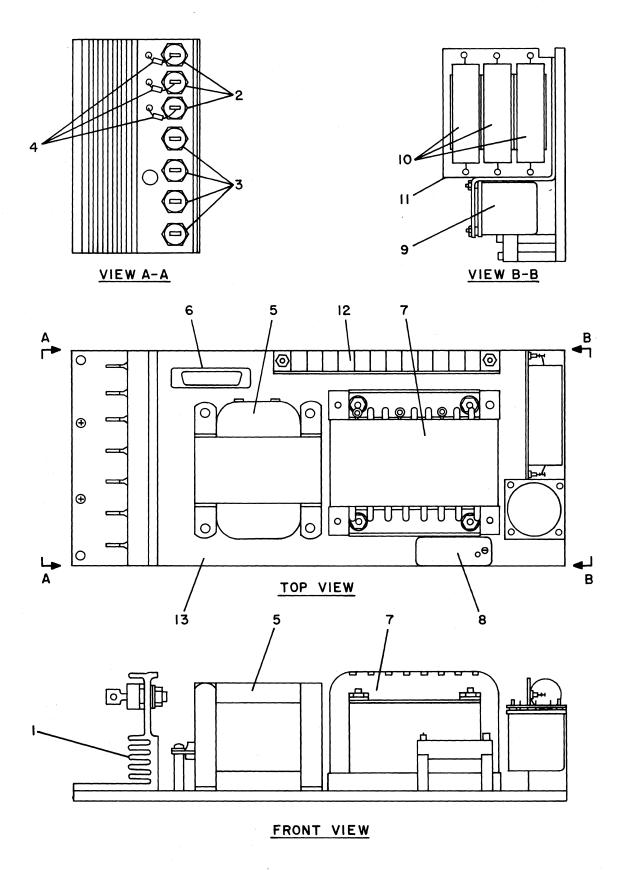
FRONT END SUBASSEMBLY A3
